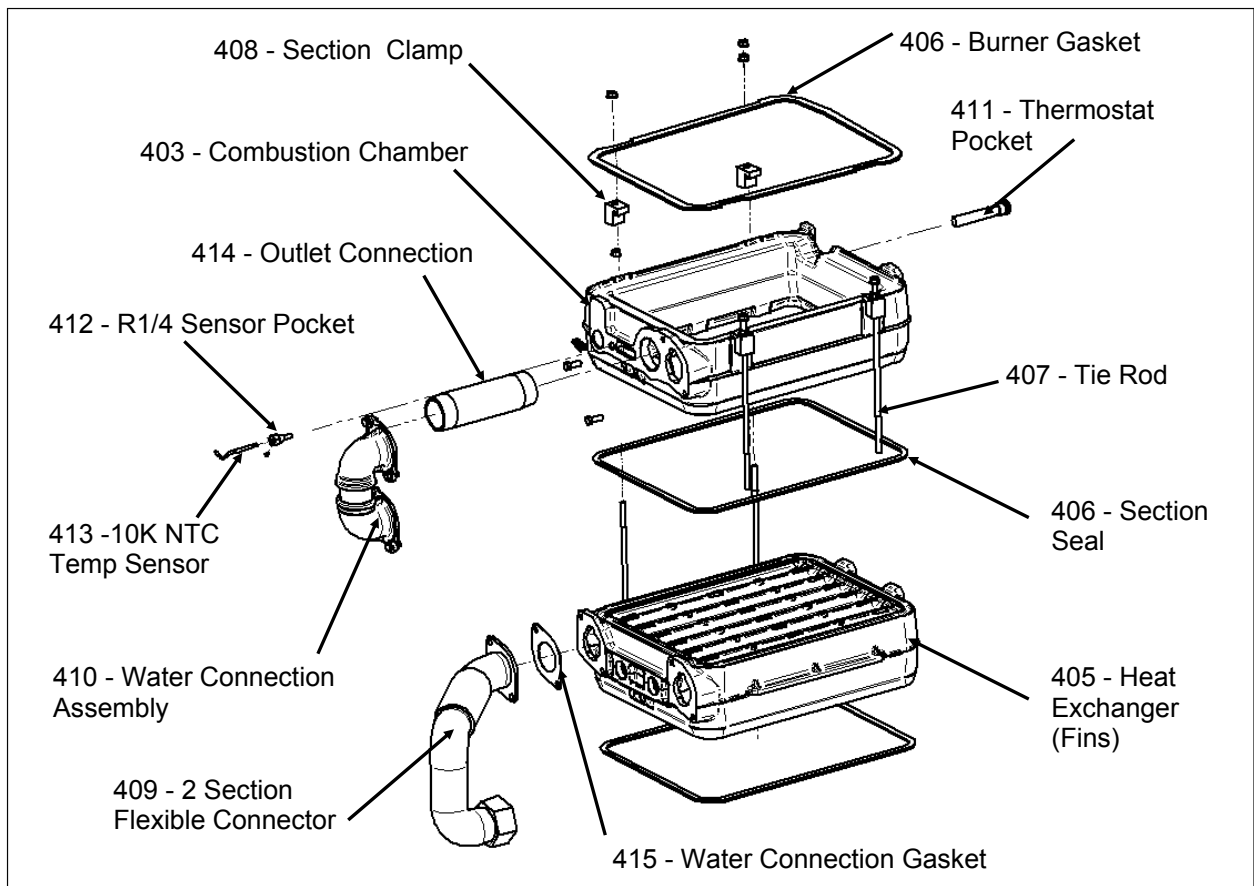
Heat Exchanger Assembly (model 70c—110c shown for illustration)
